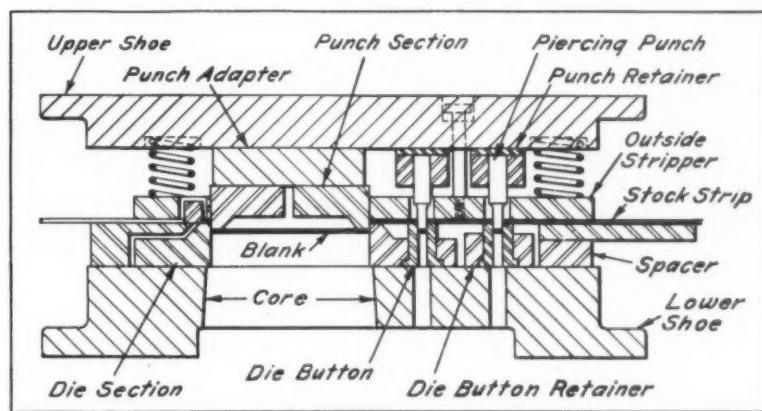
General Arrangement of a Progressive Type Blanking and Piercing Die
